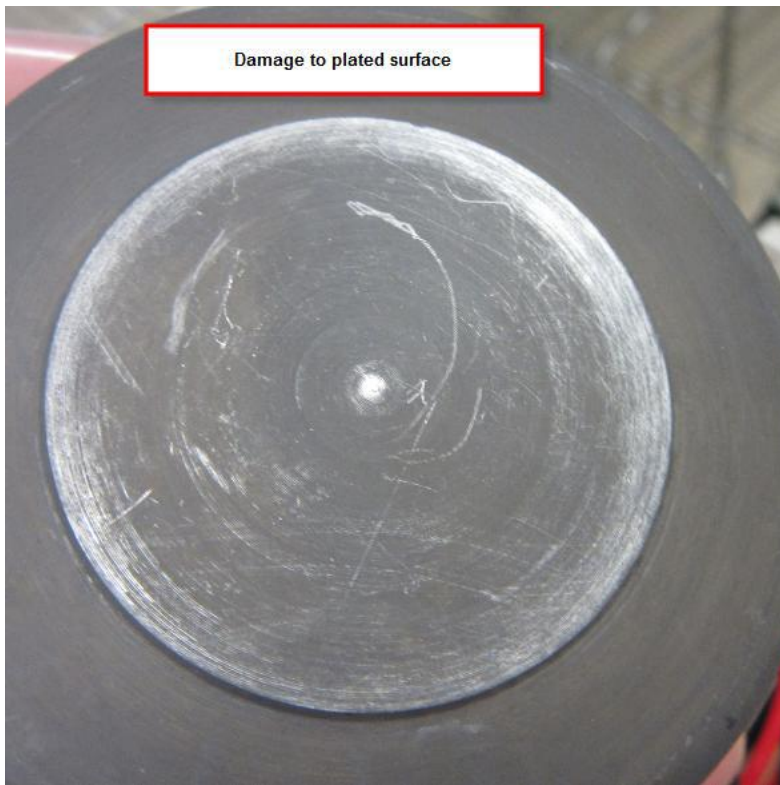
Examples of Unacceptable Plating Adhesion from Tape Test
